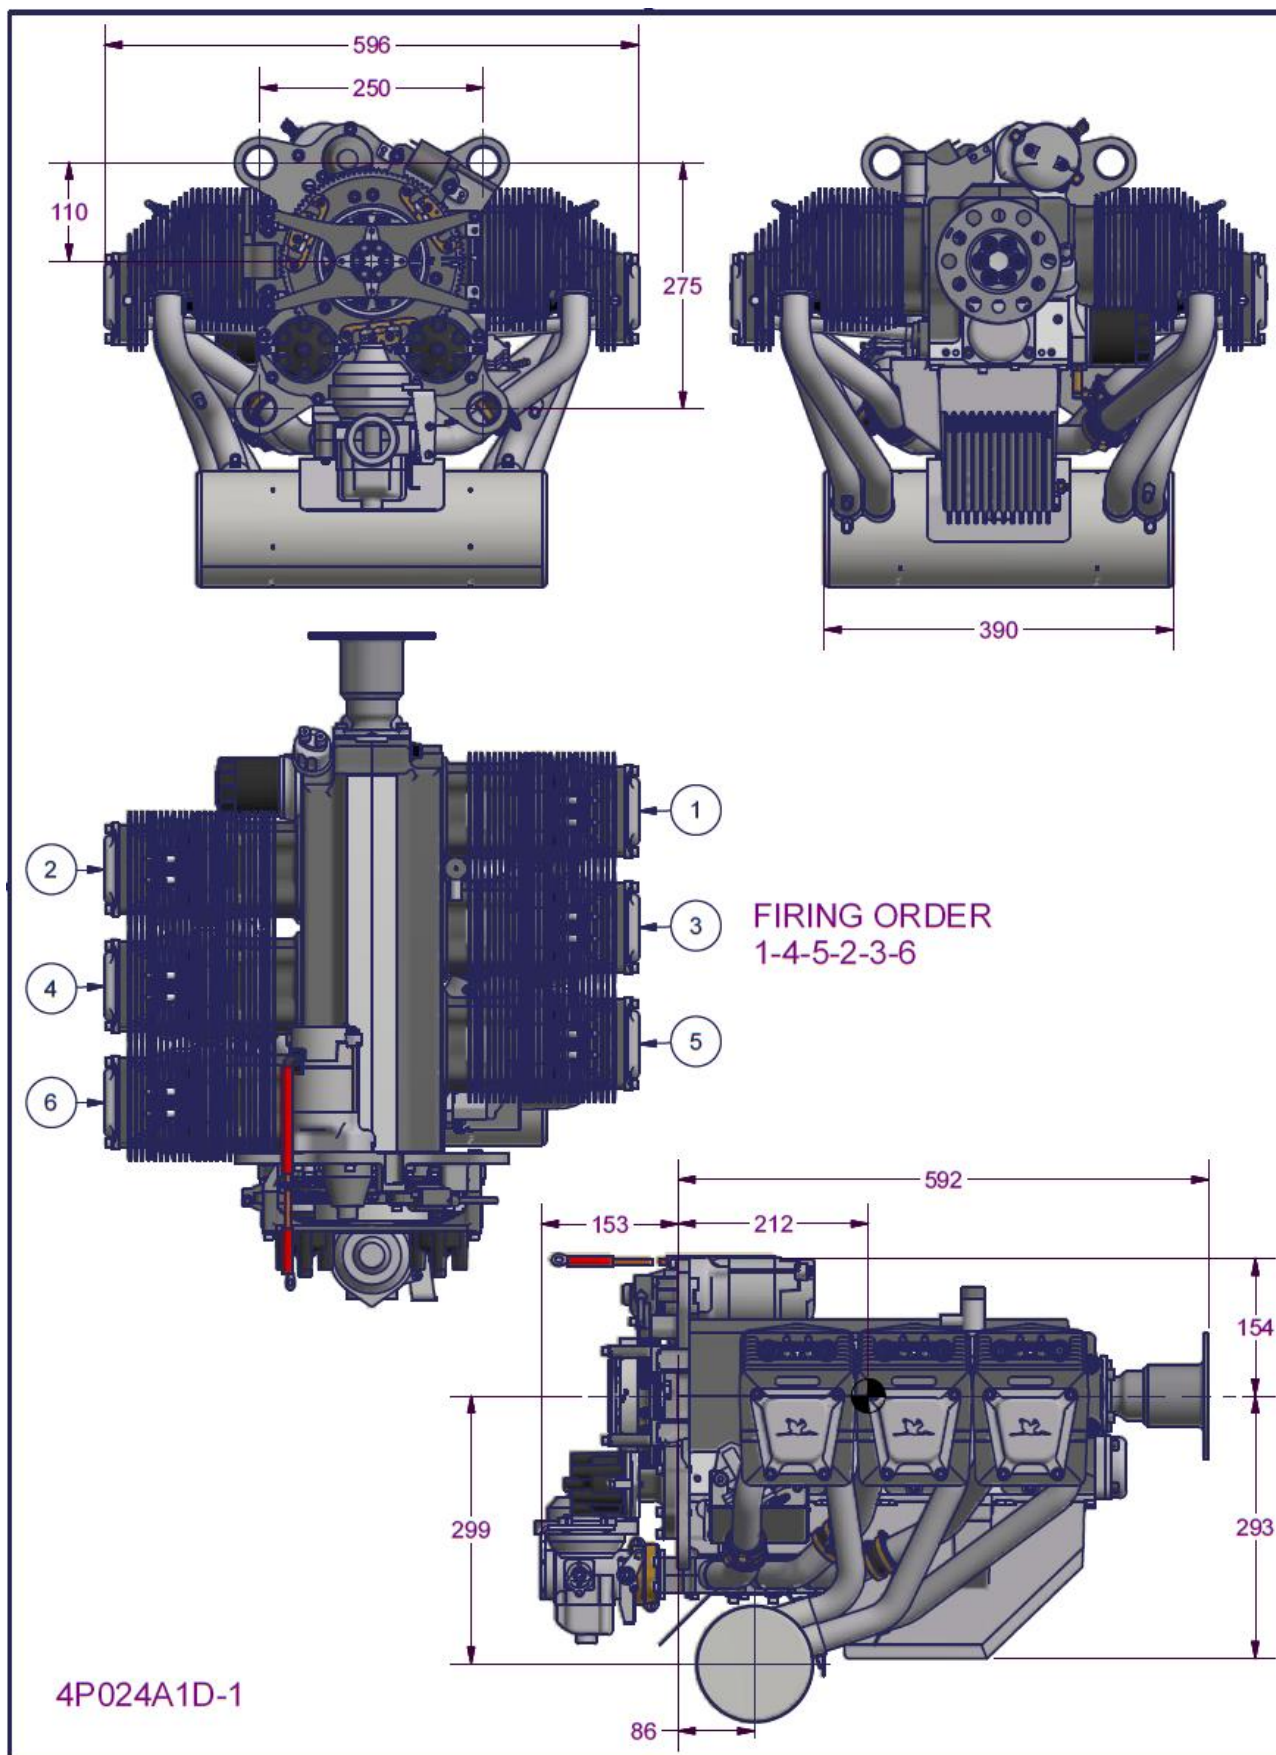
3300 Gen 4 Engine dimensions and layout
